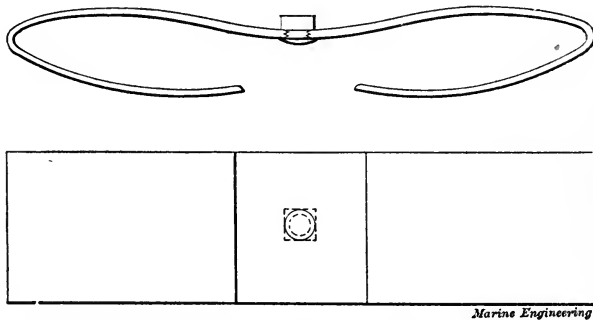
Marine Piston, Steel Springs for Packing Rings.
